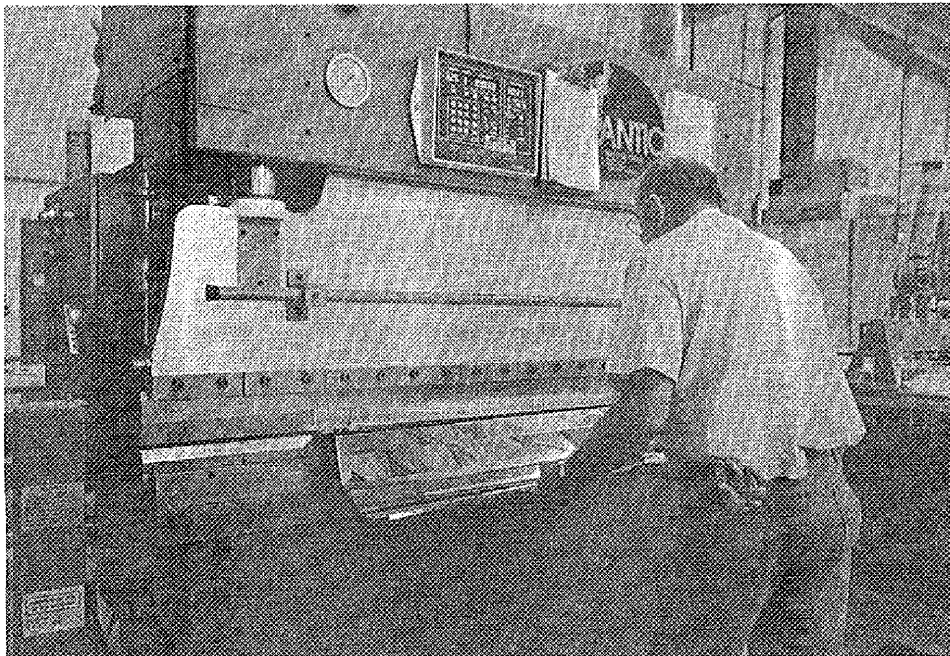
Press Brake Being Used for Fabrication of Aluminum Module Housing
